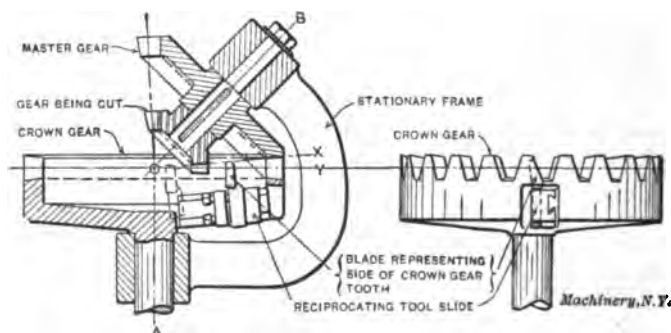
Model Illustrating the Planing or Shaping Operation Applied to the Molding-Generating Principle of Forming Teeth of Bevel Gears
